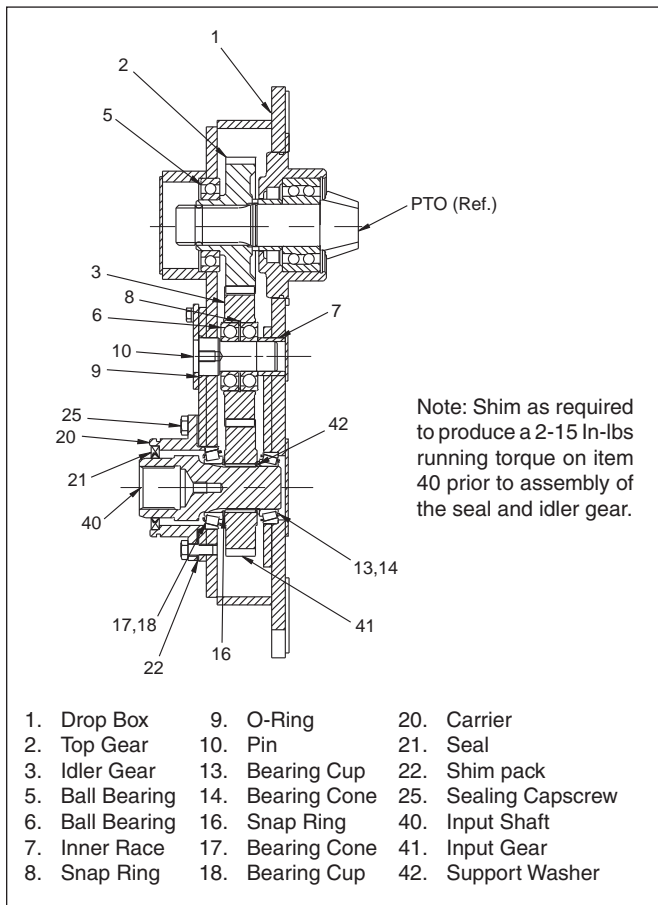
Gearbox on W8L for Caterpillar D6H/R, D7H PS, D8N, D7R & D8R
